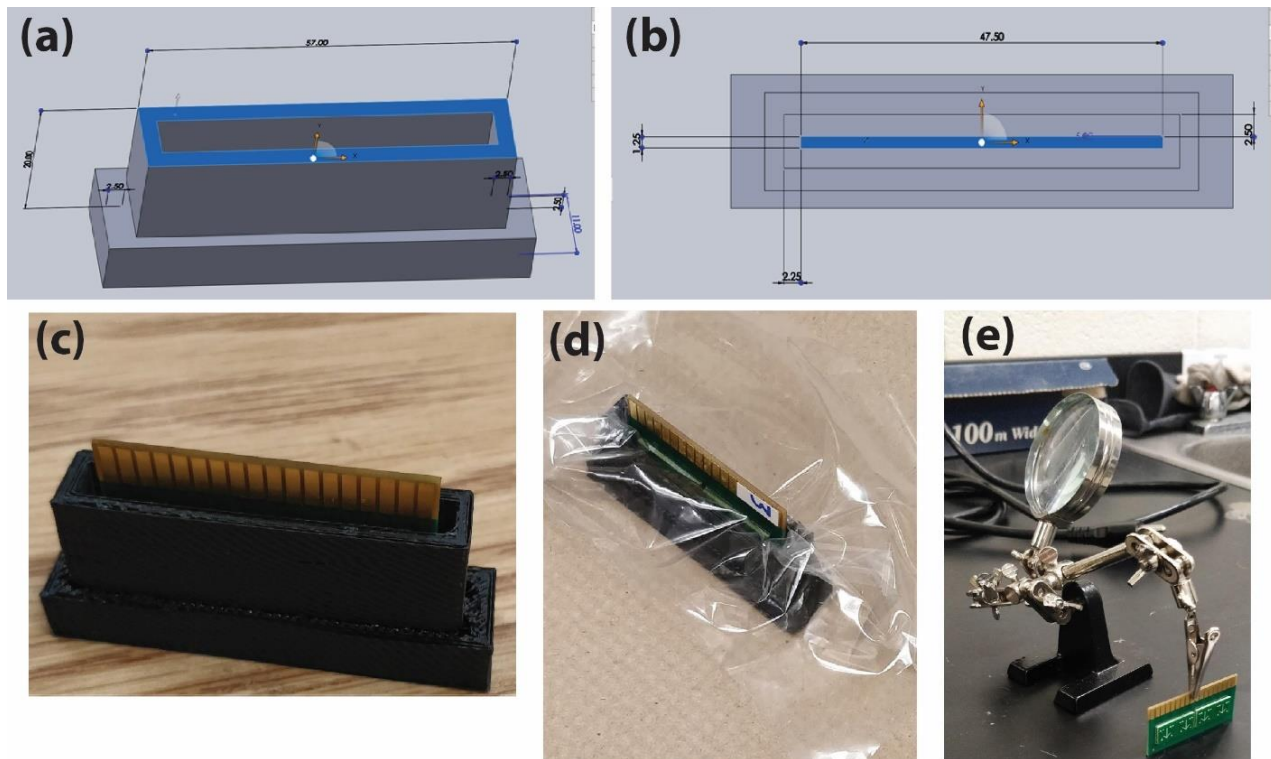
Epoxy mold, showing (a) CAD model in Solidworks. Dimensions in mm (b) top view of component, (c) component after 3D printing and PCB inversion, (d) plastic wrap usage to allow for reusable mold and (e) use of soldering helping hand to hold PCB in place during curing.
